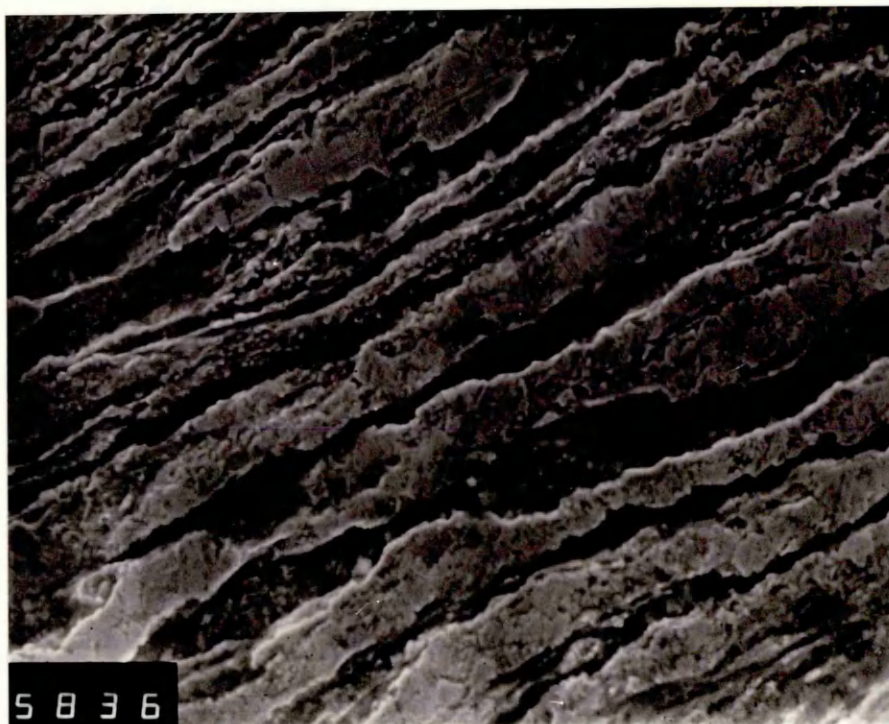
SURFACE FINISH OF MILD STEEL WIRE DRAWN
